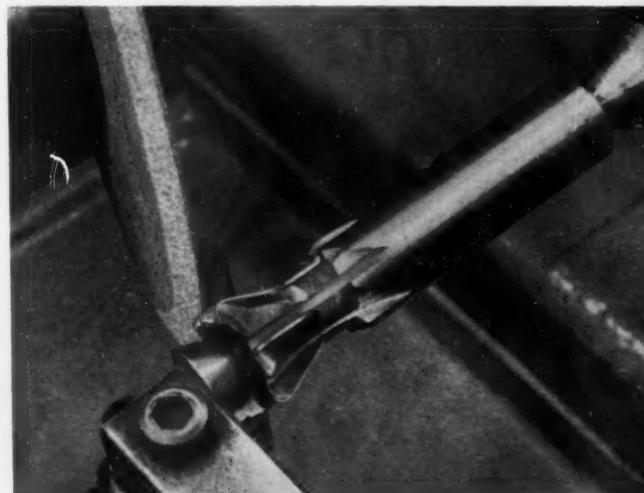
These standard staggered tooth cutters are ground together and used side by side for milling a radius.
